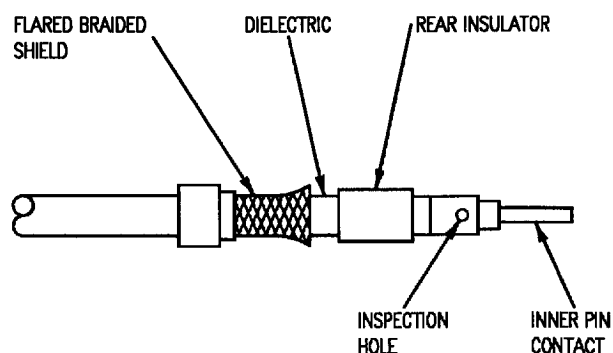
M39029/77-428 Coaxial Assembly Procedure (Sheet 1)
